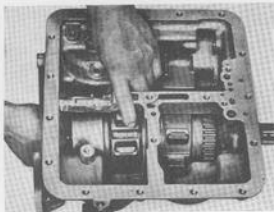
Withdrawing rear clutch and forward sun gear group
